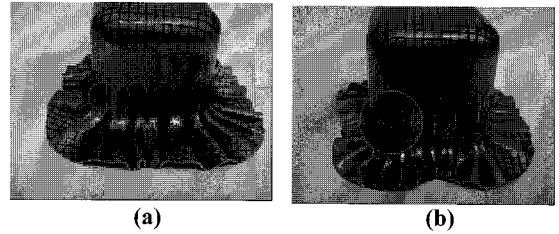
Drawing failures for set #1 (a) after 35mm drawing at 200°C, (b) after 40mm drawing at 200°C
